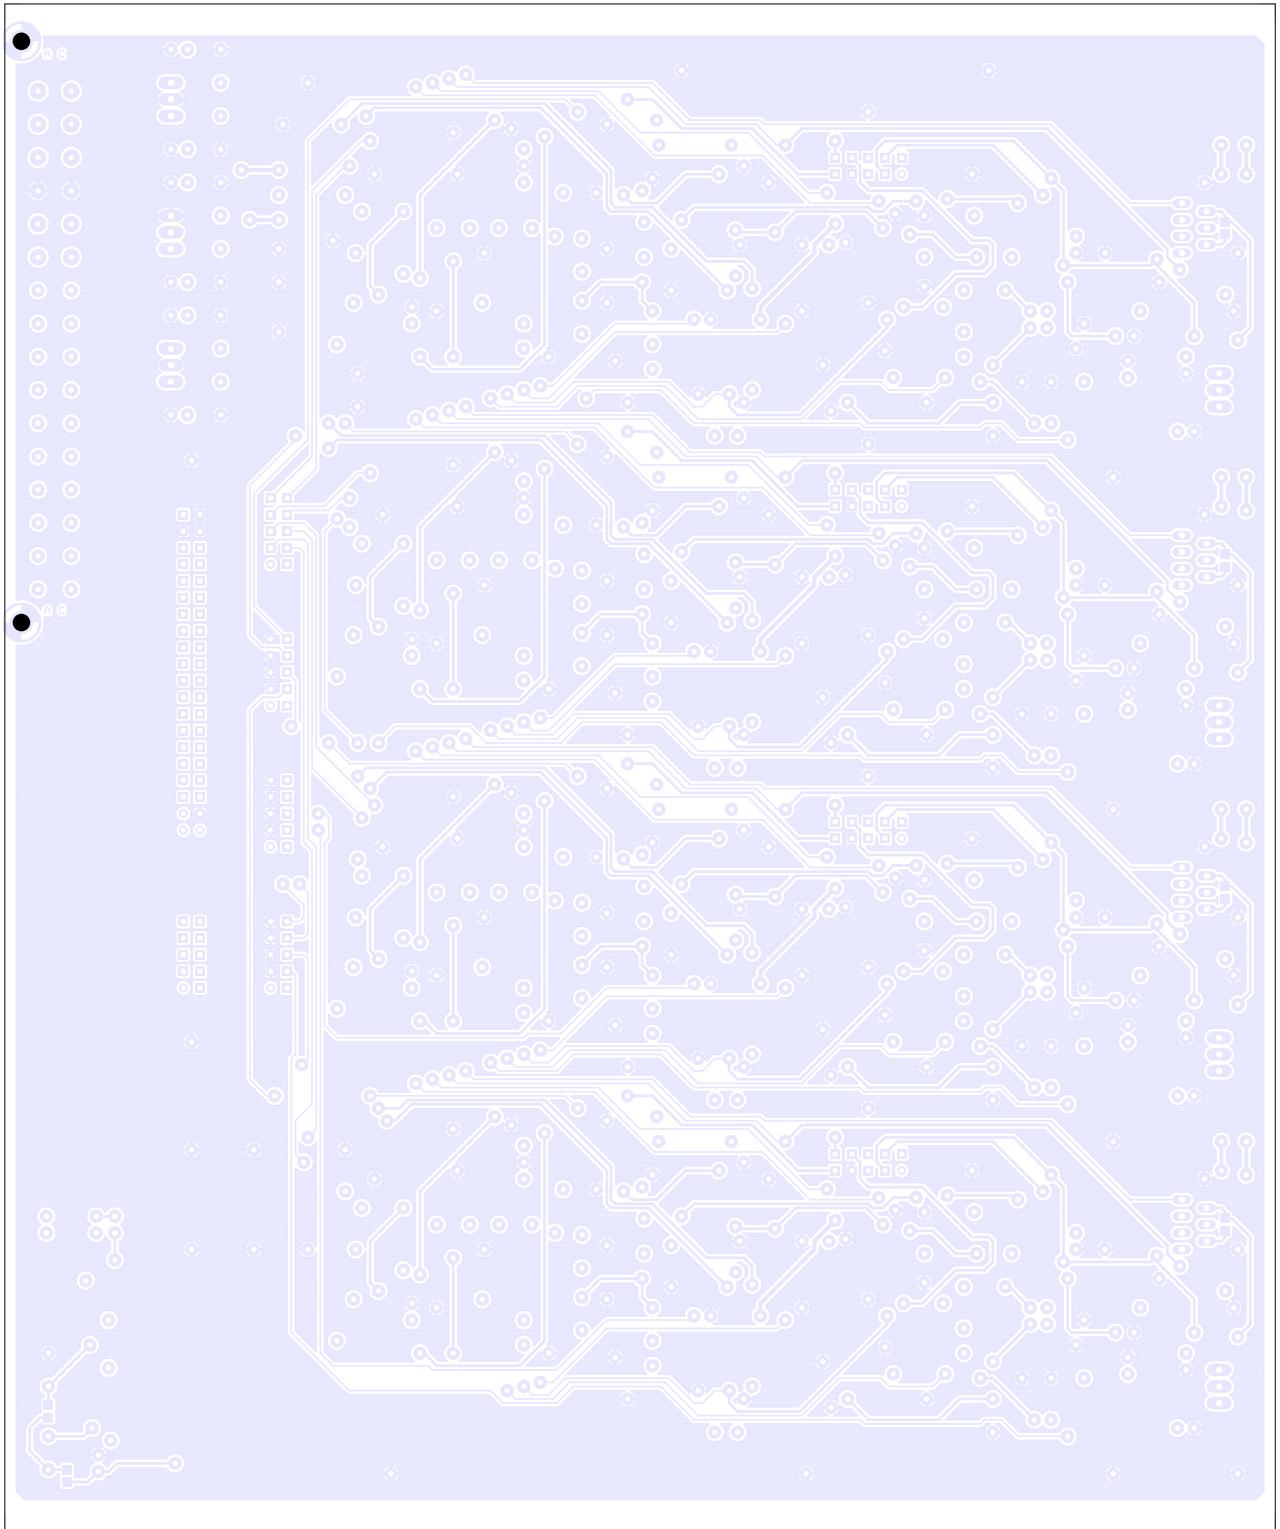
Board bottom view showing drills with 2.7 mm (0.106 in) diameter
